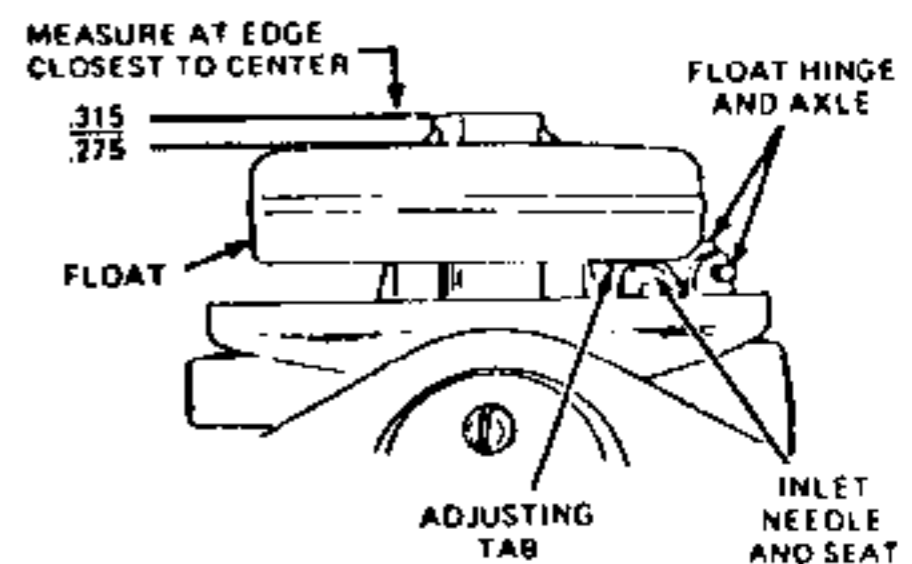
Float setting should be measured as shown. Bend adjusting tab to adjust float setting.
